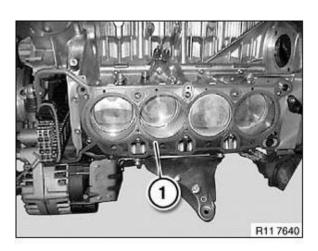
Identifying Cylinders 5-8 Head Gasket Courtesy of BMW OF NORTH AMERICA, INC.
